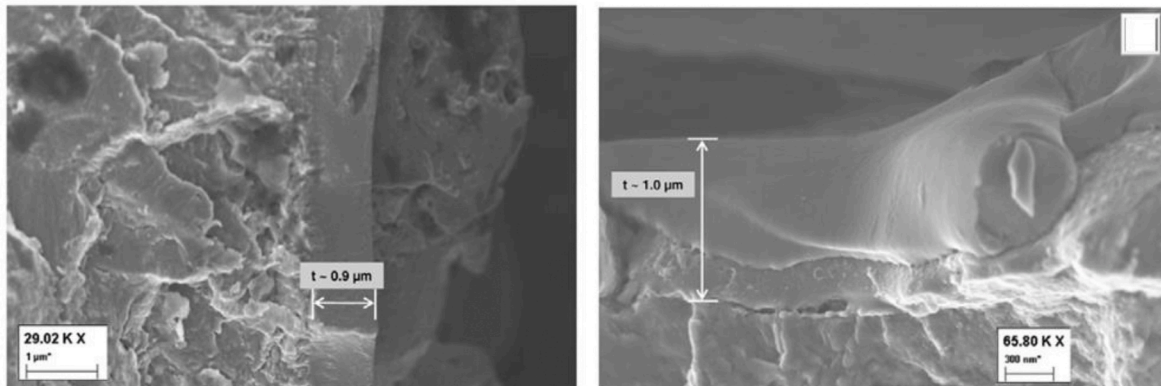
Mower [65] showed that thick recast layers induced by EDM could facilitate fatigue crack initiation, as represented in this figure where recast layer measurements are carried out on fracture-surface edges.
